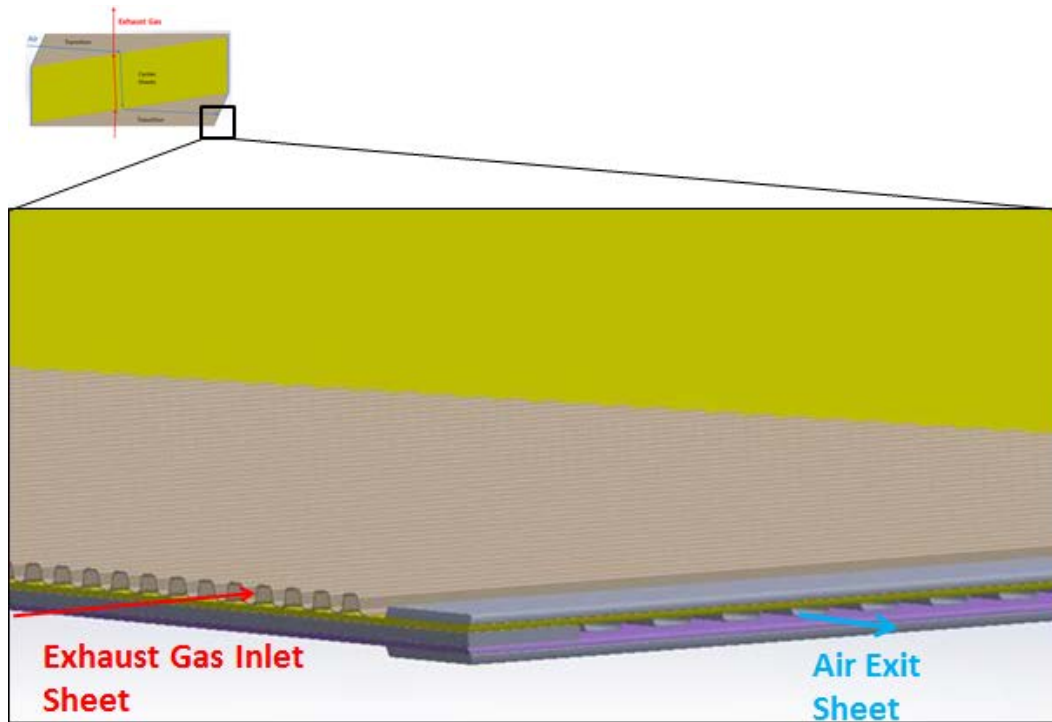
Isometric View of Recuperator Inlet / Exit Corrugated Sheets (Single Cell)
